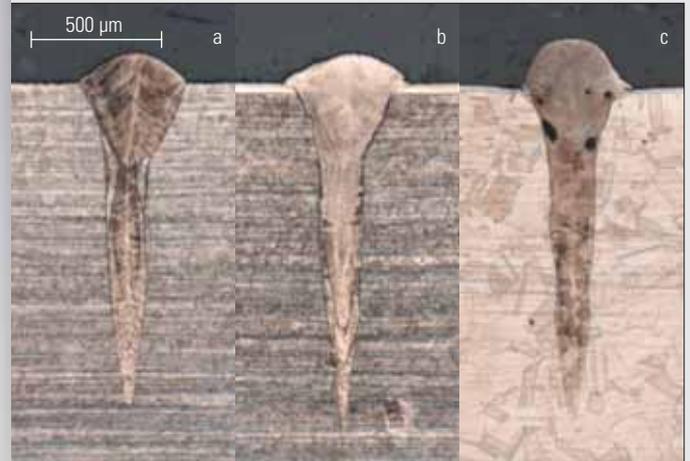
Cross section of single mode fiber laser weldments on AISI 316L stainless steel ($P: 500\text{ W}$; $v: 100\text{ mms}^{-1}$);
